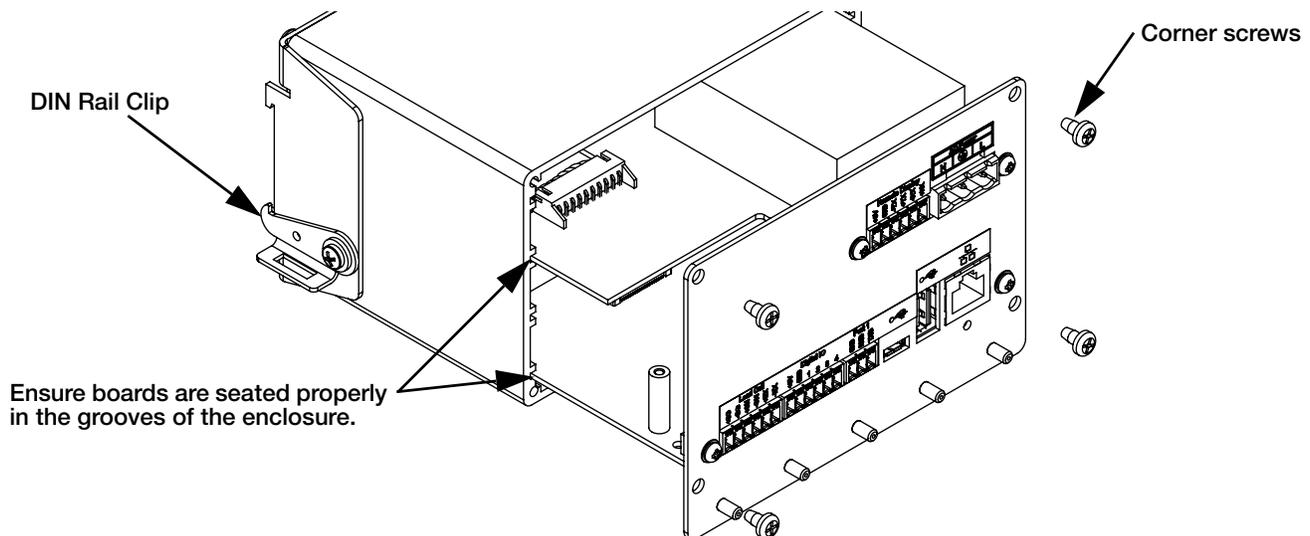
Boards Installed in Controller Assembly Enclosure
